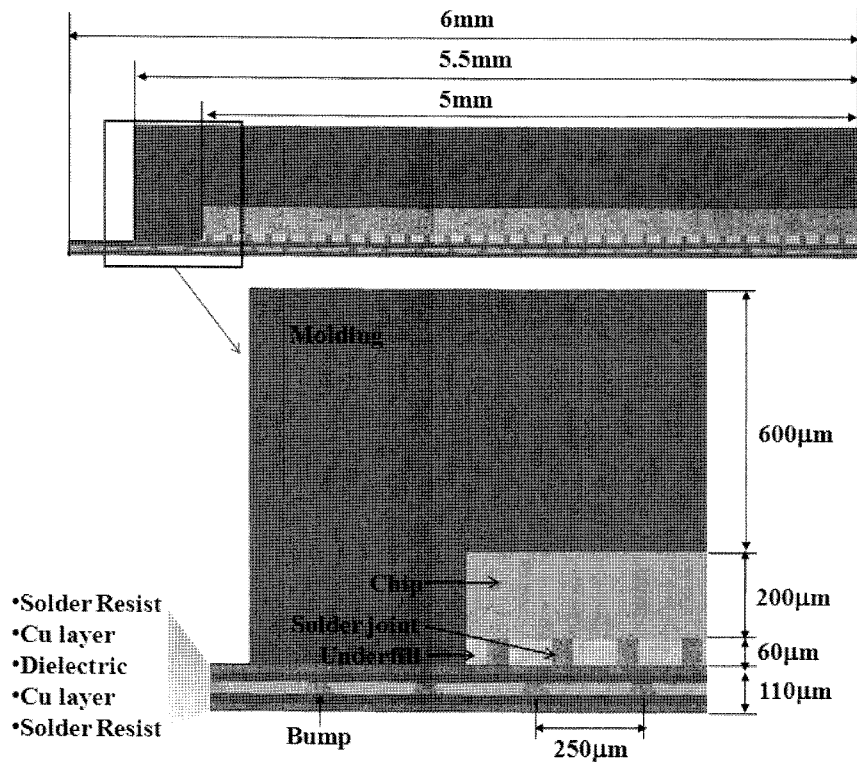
Geometries of flip chip package with buried bumps interconnected PCB
